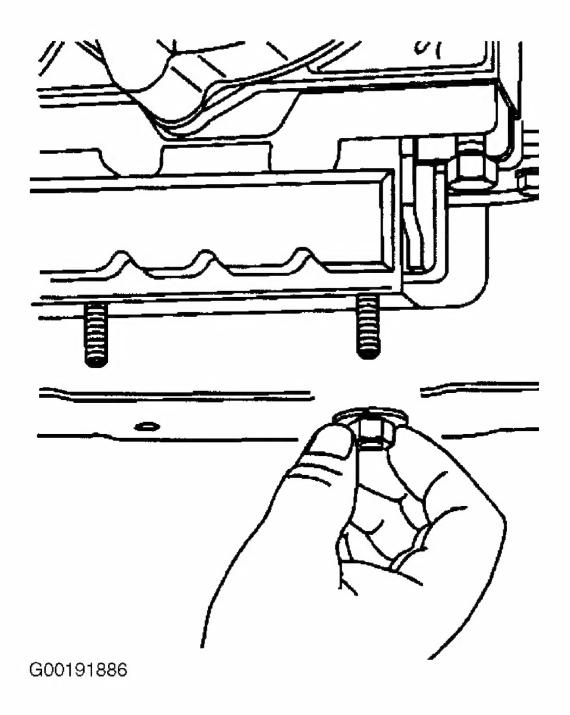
Removing Transmission Mount Retaining Bolt Courtesy of GENERAL MOTORS CORP.
